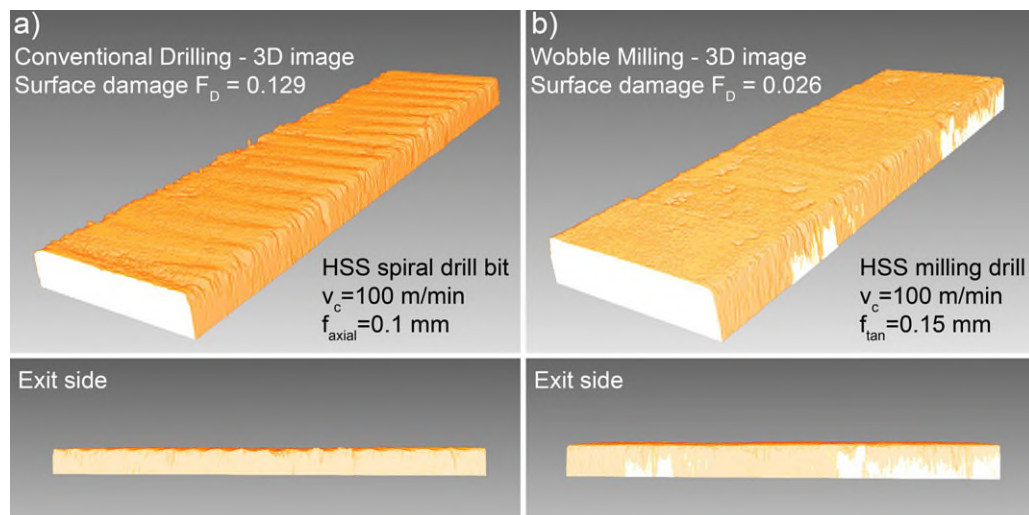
CT-scans of the drill hole surfaces of a hole machined by conventional drilling (a) as well as wobble milling (b) (unrolling of the machined surfaces).
